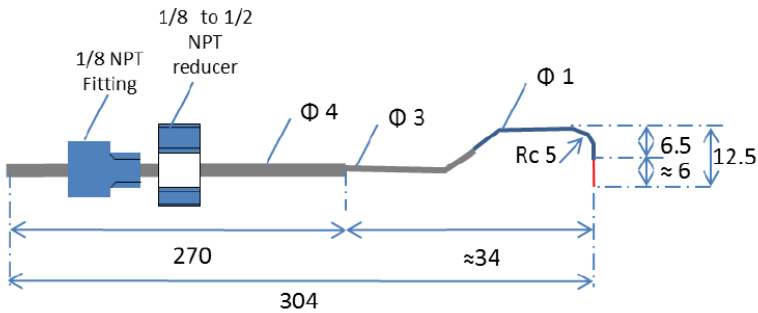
Technical drawing of the A2-Photonics fiber optical probe, dimensions are given in mm [Zua13]
